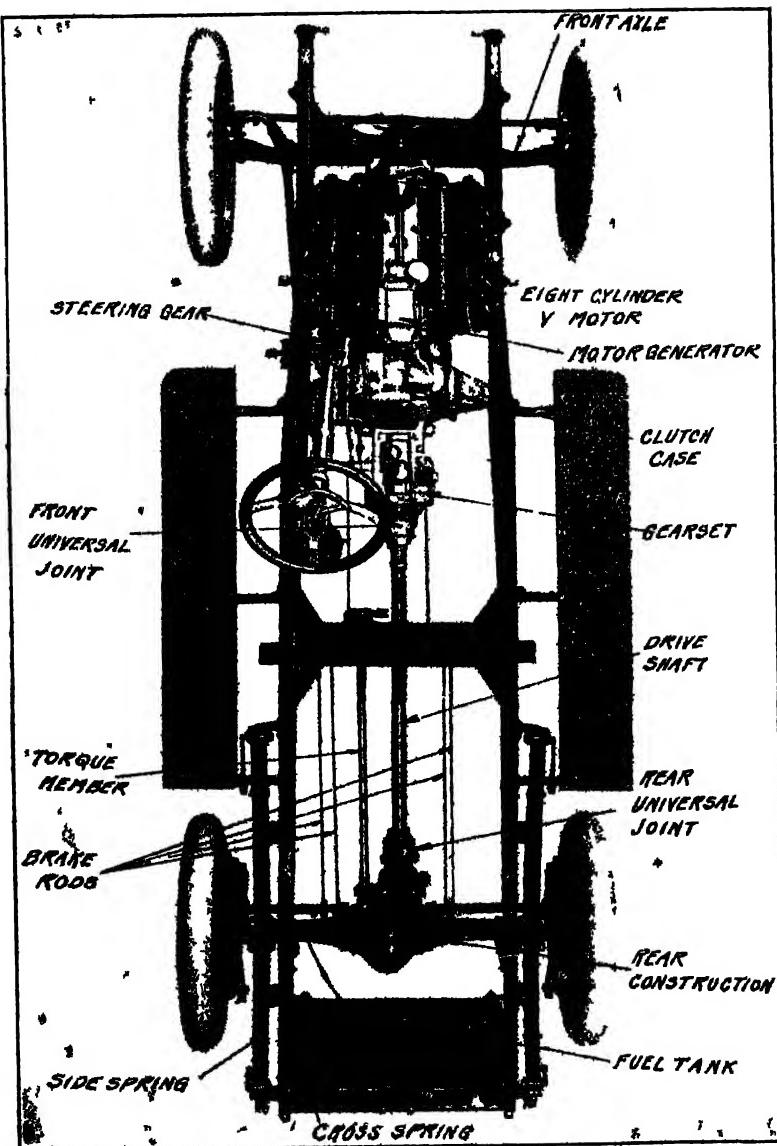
Plan View of the Cadillac 1915 Chassis, Showing Location of Eight Cylinder V Motor and Unit Gear Set
